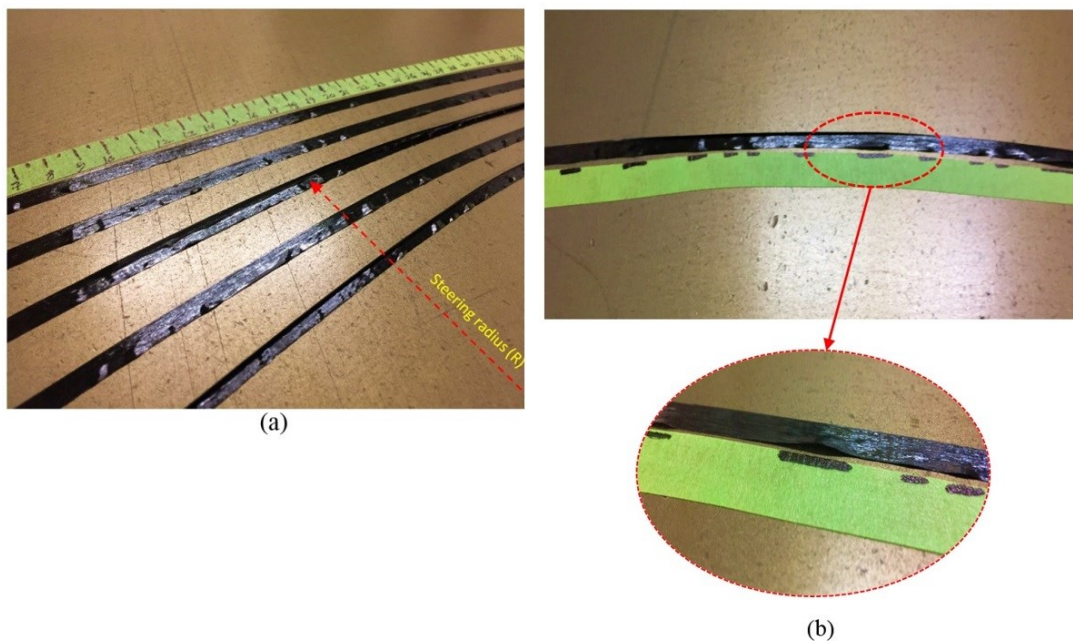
(a) Steered tows on Aluminum tool; (b) wavelength measurement using adhesive tape
